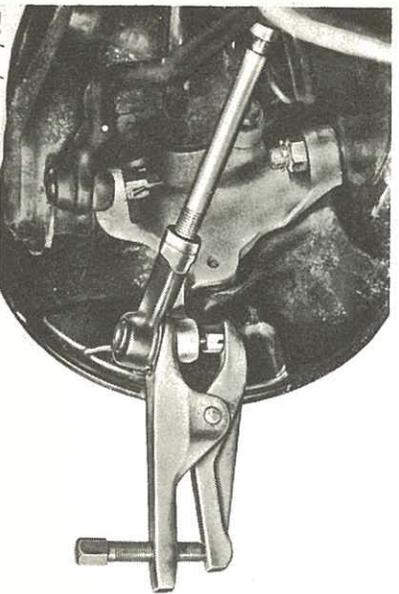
Removing Tie Rod from Steering Arm (Typical)
